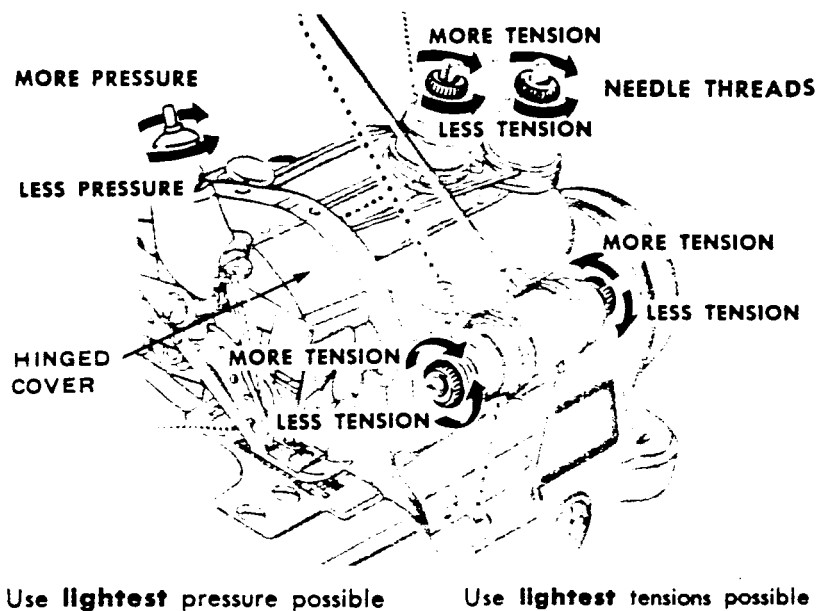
Regulating Tension on Threads and Pressure of Presser Foot on Material.
